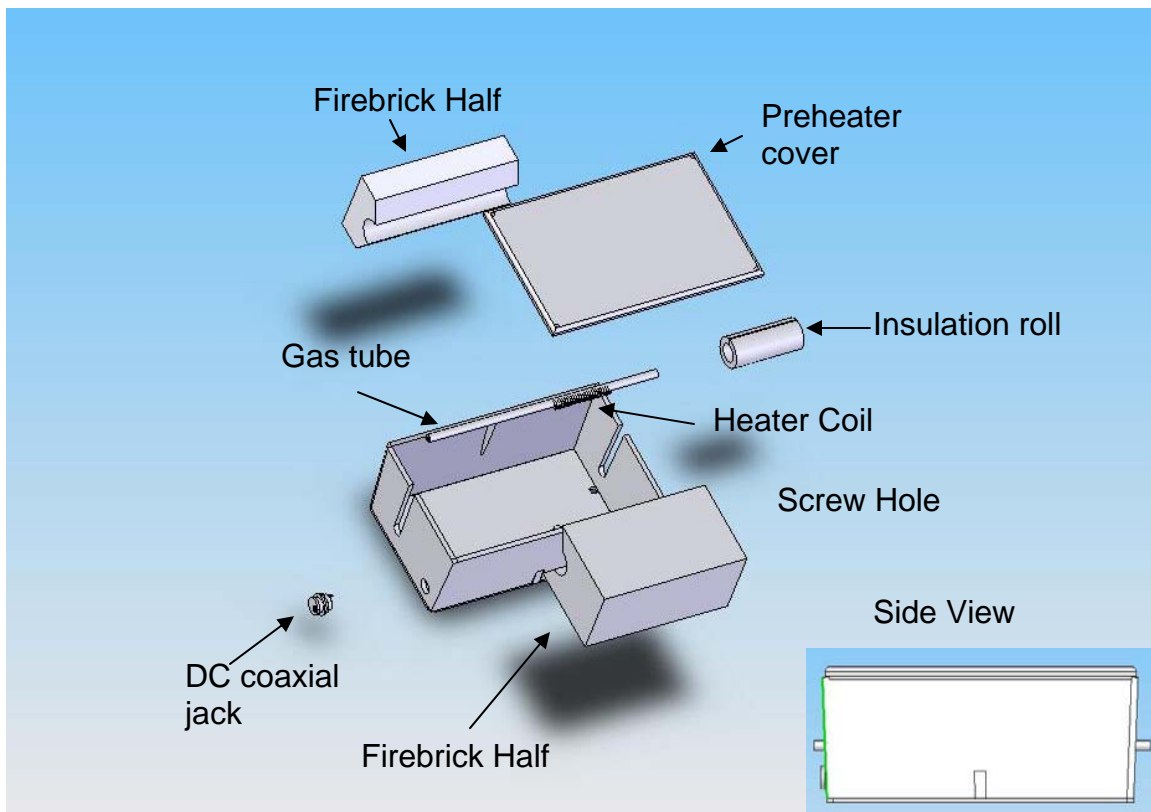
Exploded 3D Cad drawing of the preheater assembly
